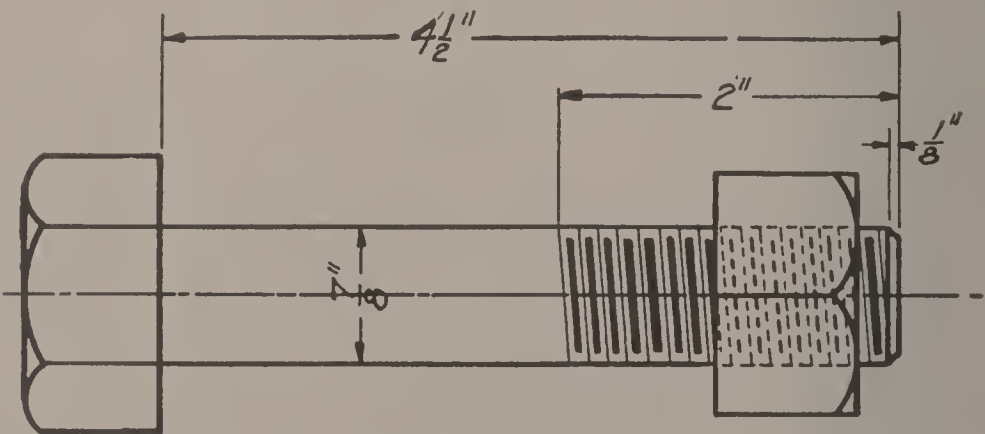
Conventional Drawing for Machine Bolt and Nut
